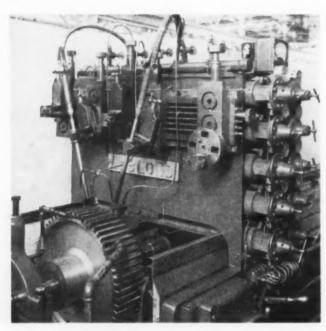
GEARS FROM FOUR TO ONE DIAMETRAL PITCH AMONG THE MOST UNIVERSAL FLAME-HARDENED PARTS
